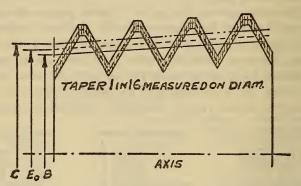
Relation of tolerance to basic dimensions of a correct taper pipe thread gage
